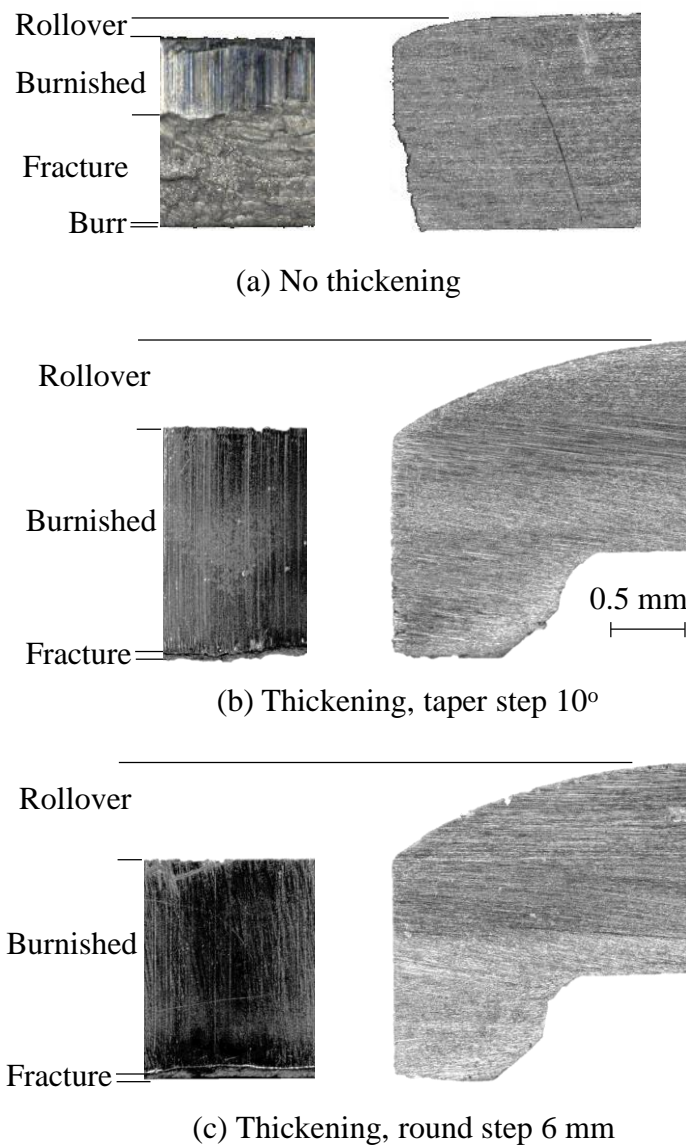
Comparison of surface and cross-section of sheared edge between punched sheet with and without thickening of hole edge.
